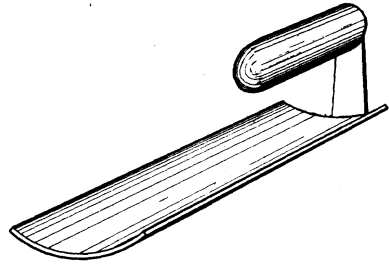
Trowel Used for Removing Spanish Tile from Cutter.
